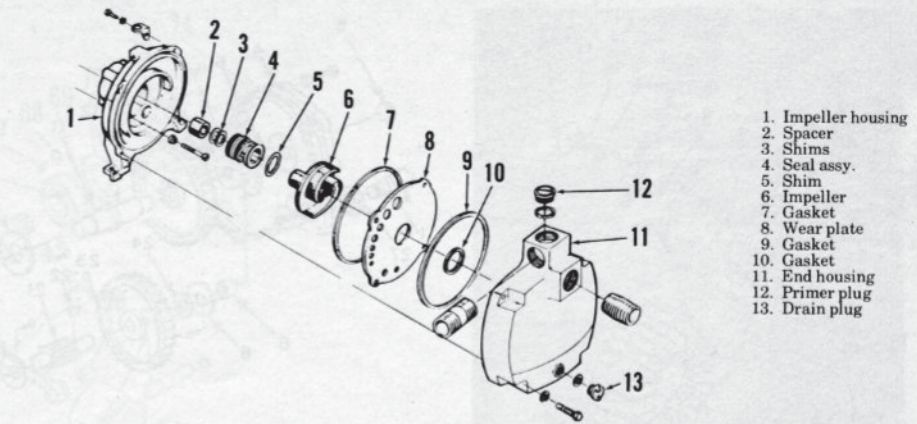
Exploded view of centrifugal pump. End housing (11) and impeller (6) must be removed to allow removal of the four cap screws retaining impeller housing (1) to engine. Hold flywheel from turning with pin (see magneto section) to unscrew impeller.
